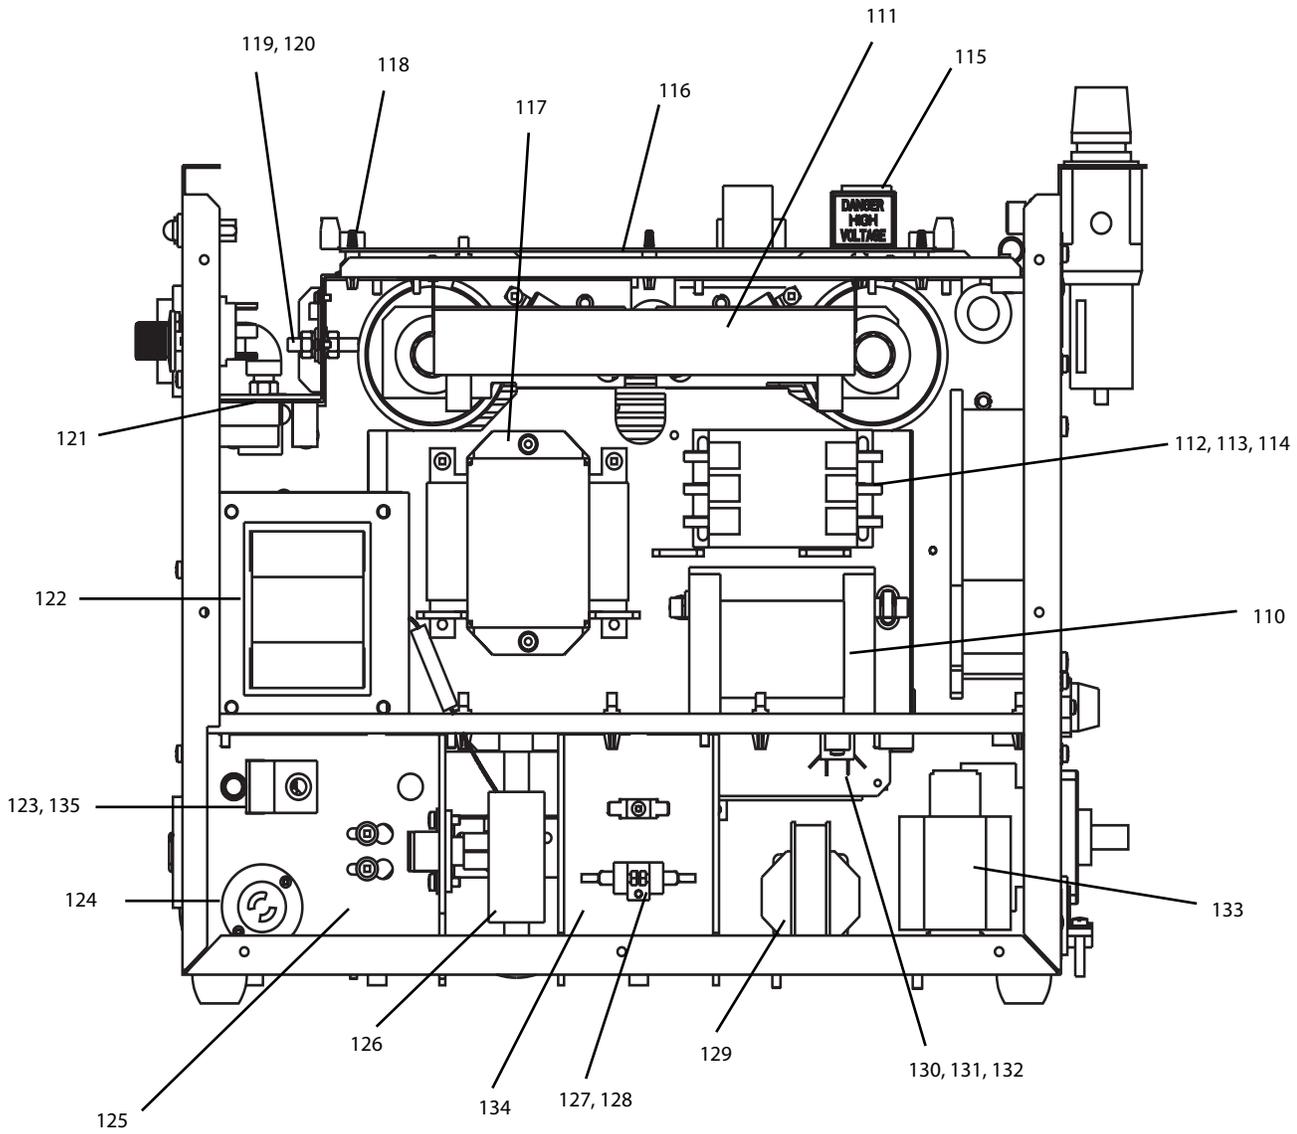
PCM-1125 Power Source, Right Side View (460/575 V)
